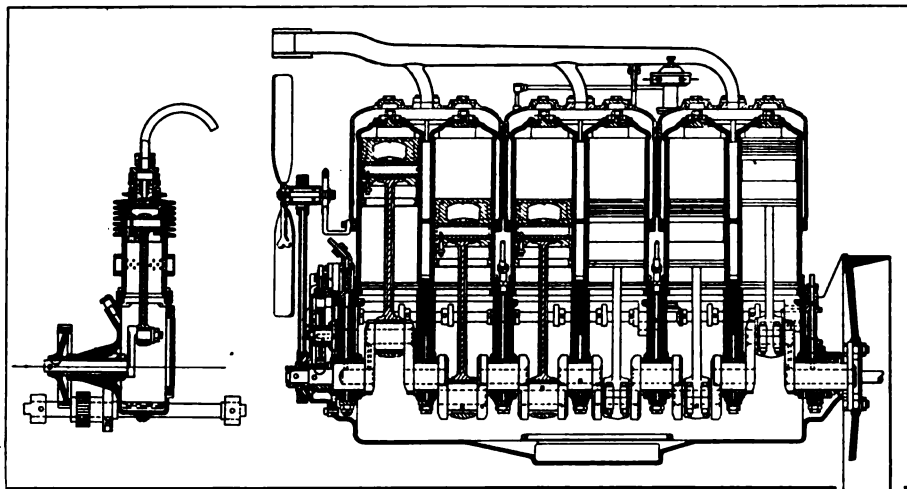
Lateral cross-section of a Pierce-Arrow motor with seven-bearing crankshaft and the section of the air pump for tire inflation
